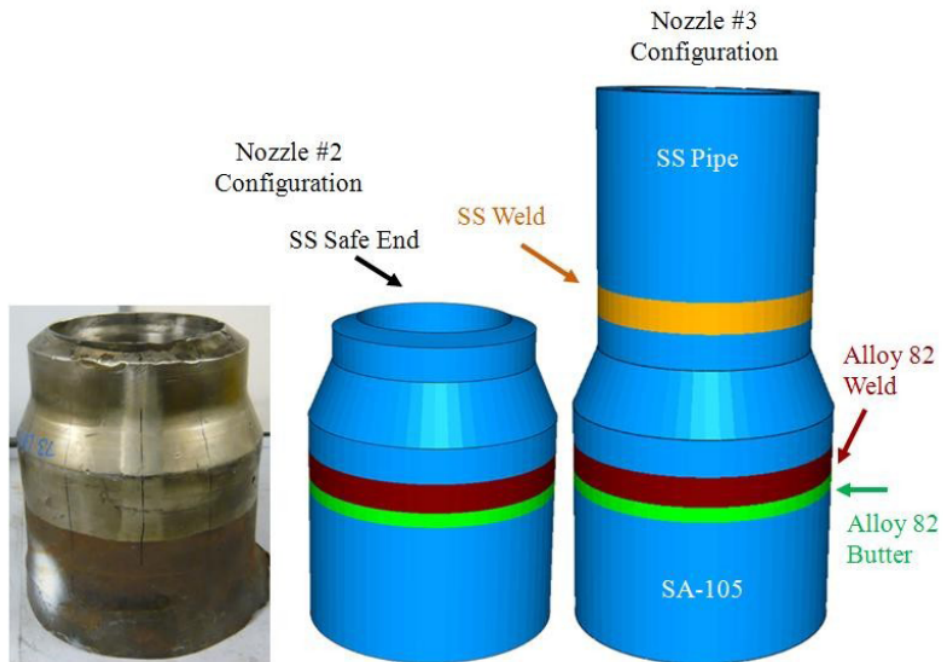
Actual Nozzle and FE Model before and after Pipe Weld
